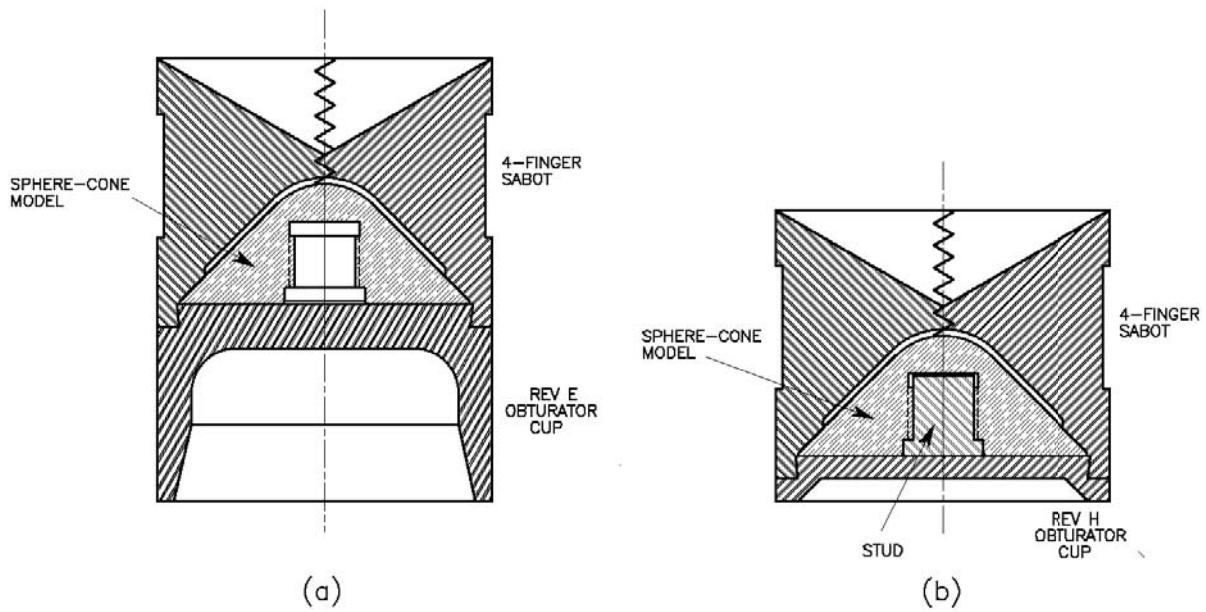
Section drawings of two launch packages for enclosed sabots. Shown with (a) revision E (REV E) and (b) with revision H (REV H) obturator cups. Left package has no stud in the model while the right package drawing shows the stud in the model used for the second of the two shots made with the REV H obturator cups.
